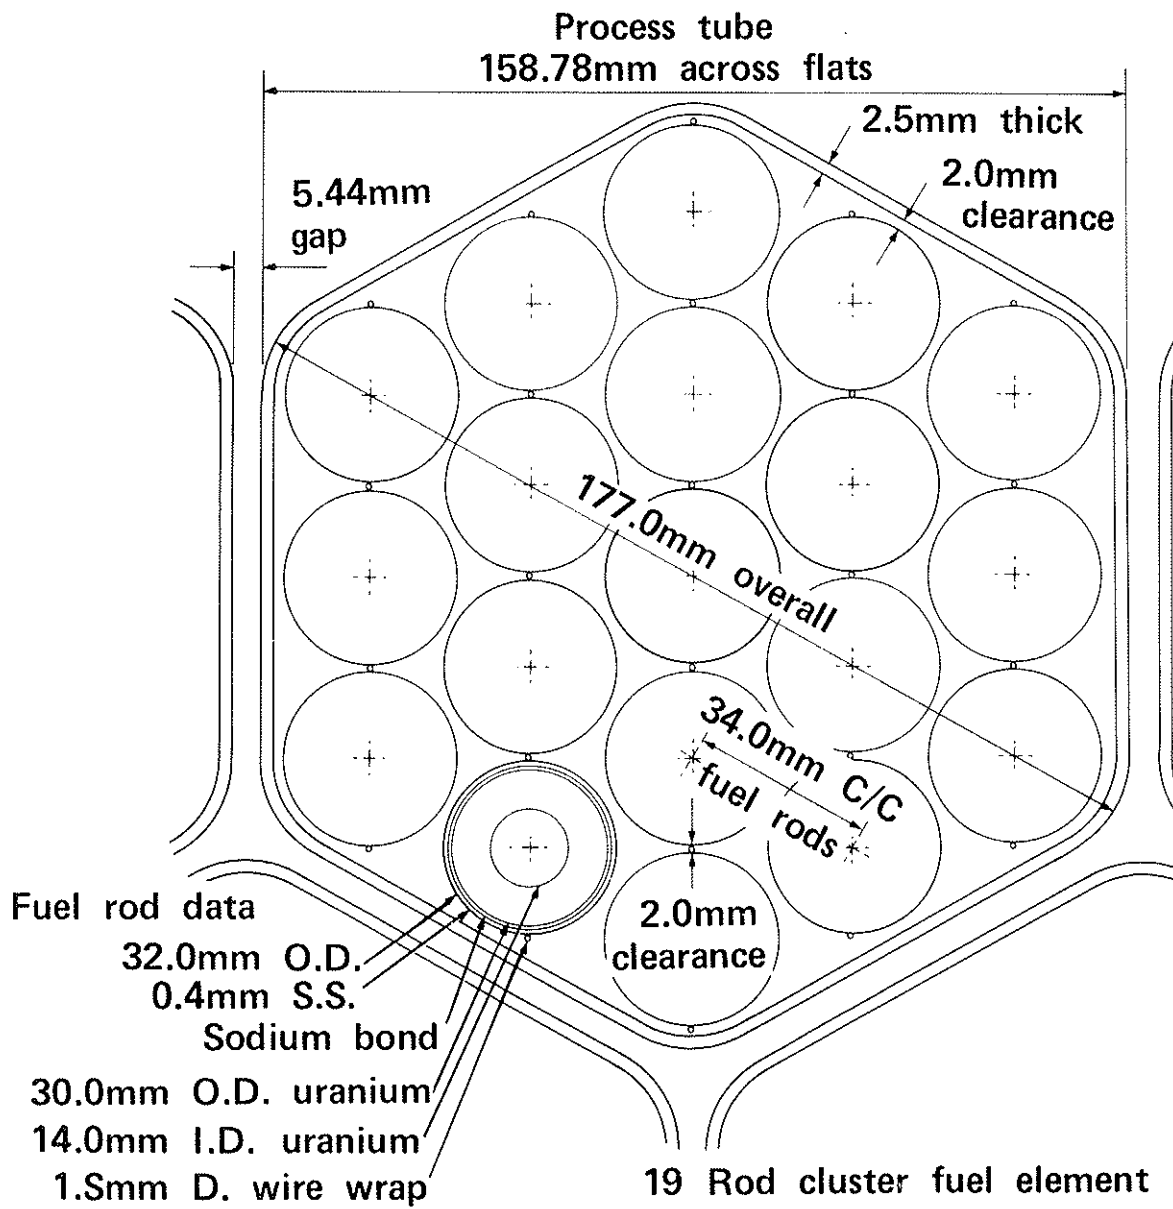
Fuel Assembly Cross Section (Full Size)
